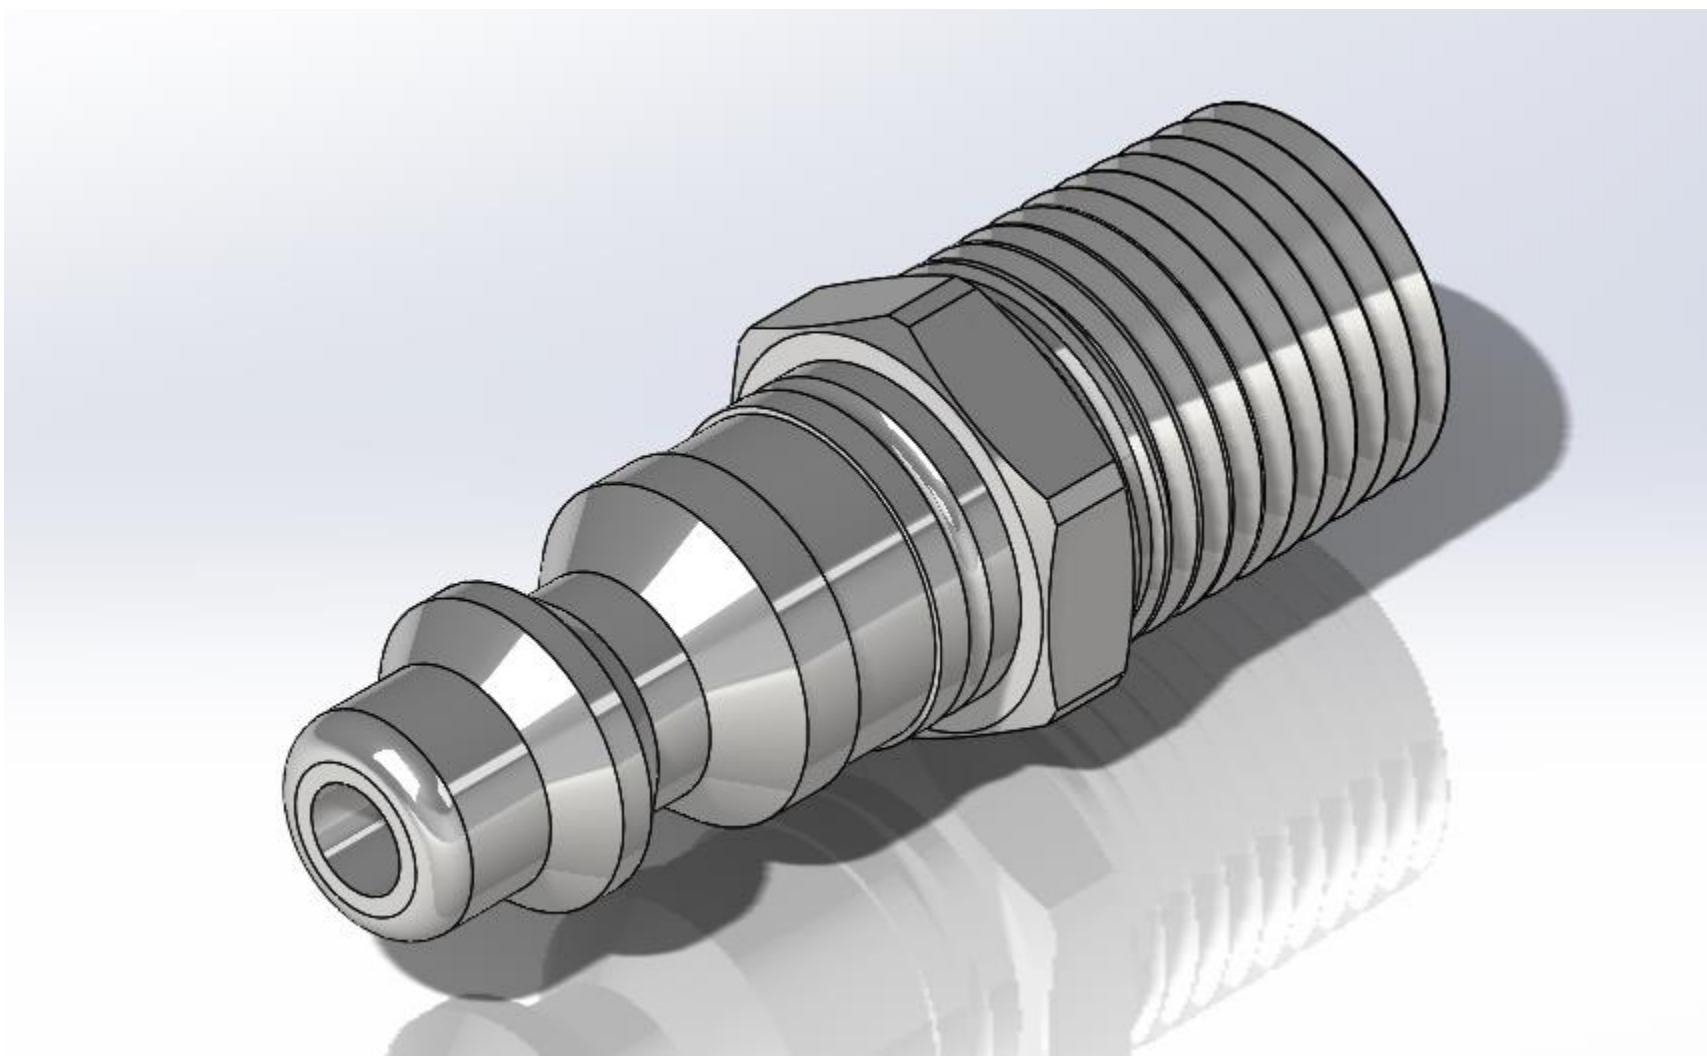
Part 1024 (Industrial-Shape Hose Coupling Size $\frac{1}{4}$, Zinc-Plated Steel Ply, $\frac{1}{4}$ NPTF Male End) CAD Drawing
